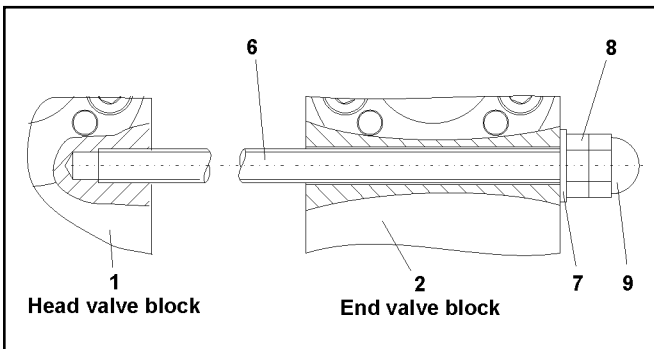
Threaded bar => Parts list, see Table 1 on page 2
